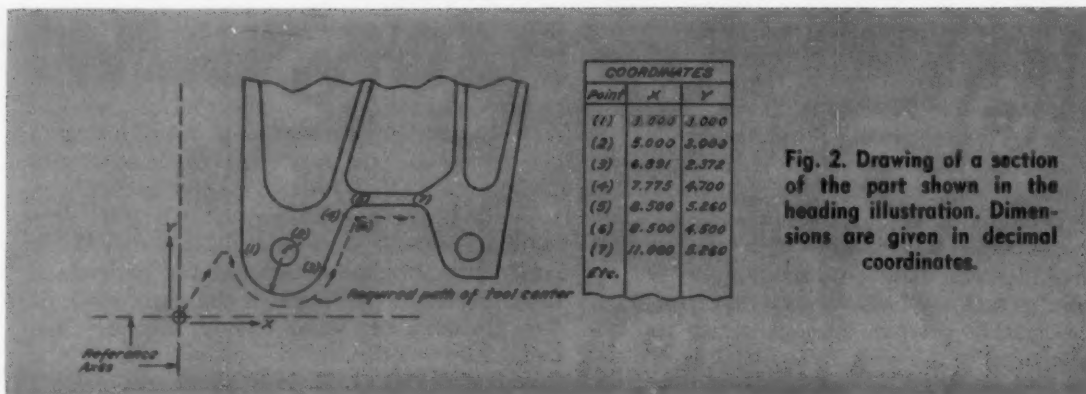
Drawing of a section of the part shown in the heading illustration. Dimensions are given in decimal coordinates.
